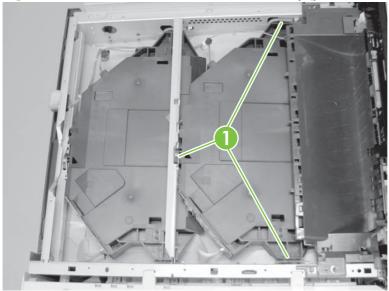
Remove the laser/scanner assembly (yellow and magenta) (2 of 3)
